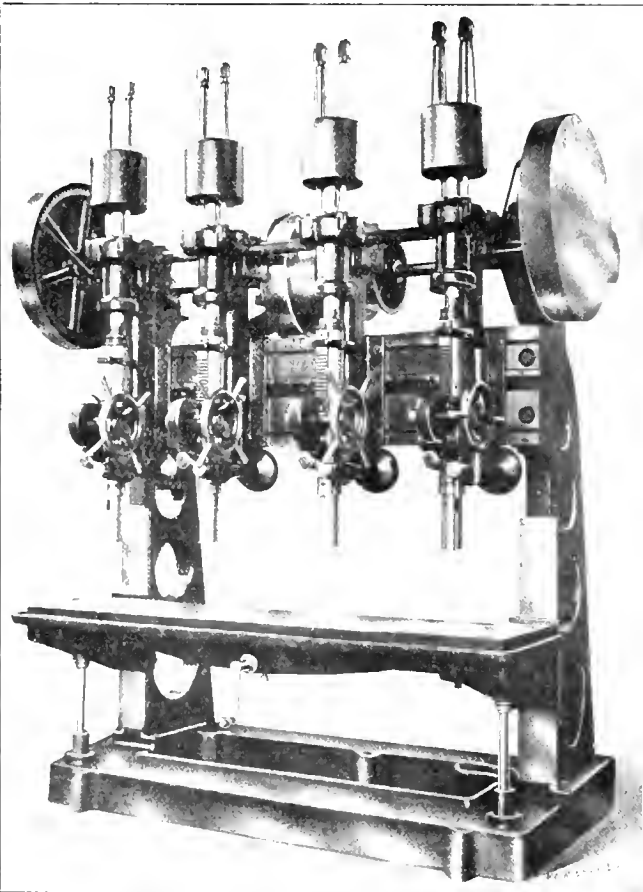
Multiple Spindle Drill of Linear Adjustable Type
